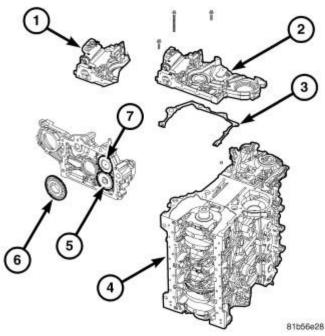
Vacuum Pump And Oil Pump Courtesy of CHRYSLER LLC
